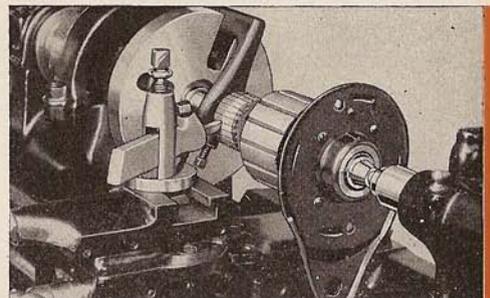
A Ford Generator Armature with End Cap Attached Mounted in the Lathe for Truing.
